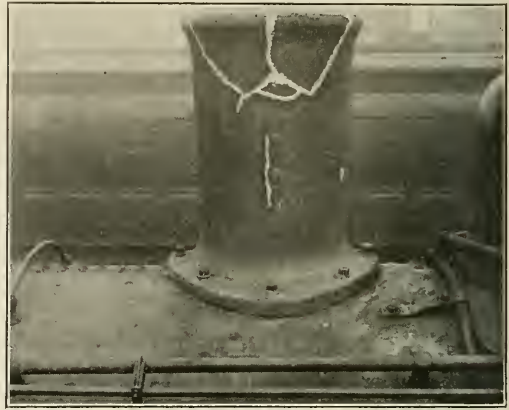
Smokestack Repaired By Electric Welding
